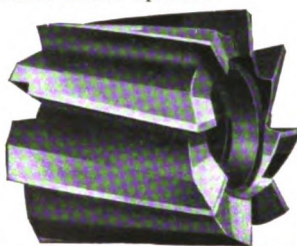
Undercut Coarse Tooth End Mill, Right Hand Cut and Spiral
